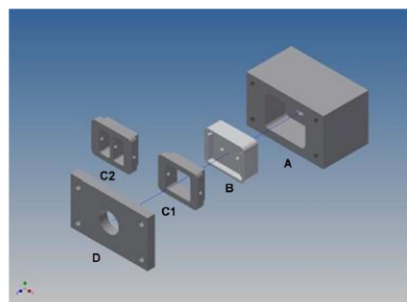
The components of the LIAD foil preparation chamber. Each part is labeled for easy referencing in the description of the chamber. A is the primary cavity, B the foil holder, C1 the forming mandrel, and D is the lid. C2 is an interchangeable mandrel that can replace C1, allowing for the preparation of a foil with two different analytes on separate regions of the foil.
